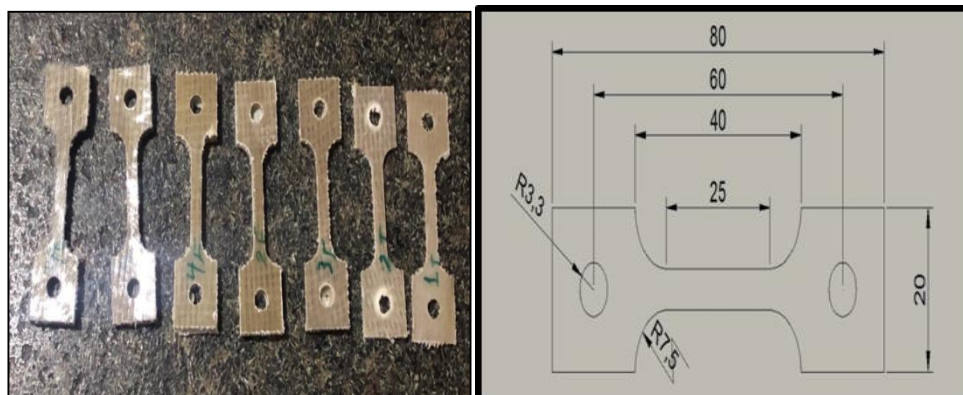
(a) Samples before a test, (b) The dimension of specimens.
